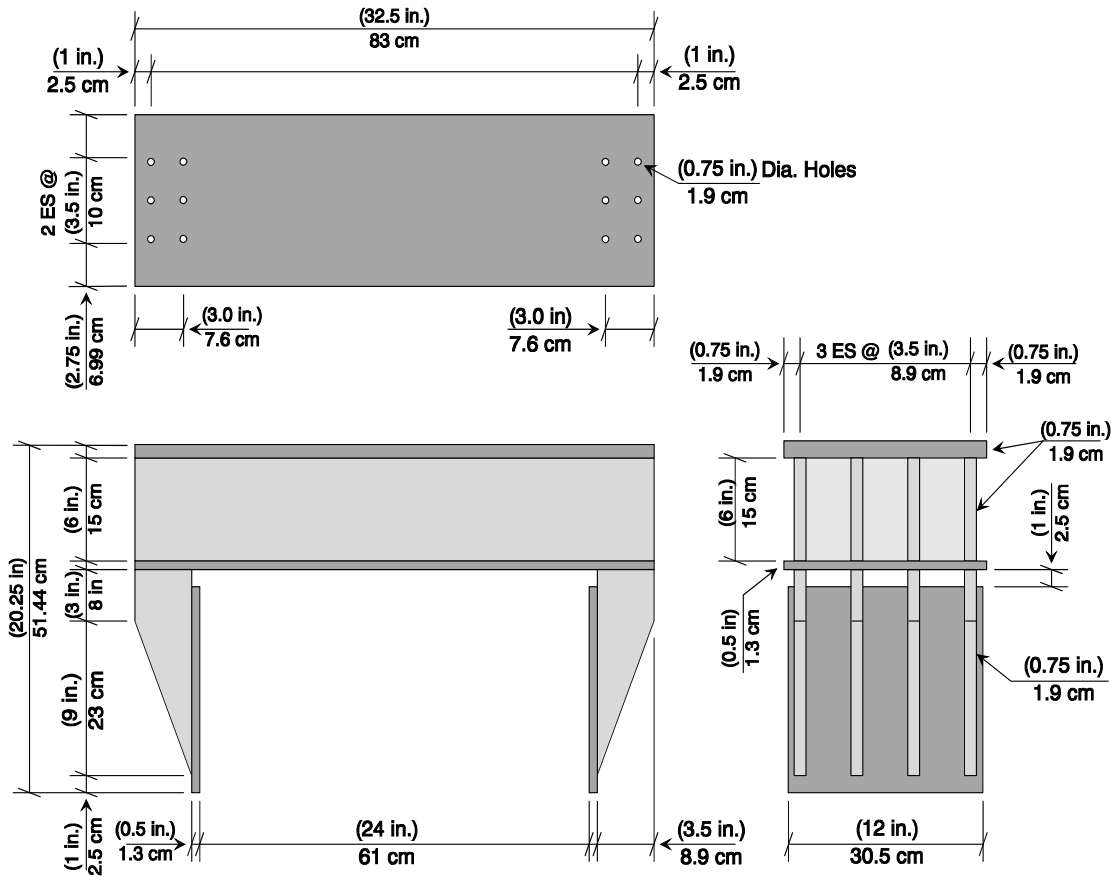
Dimensions of Top Beam Assembly [From Ref. 3]
